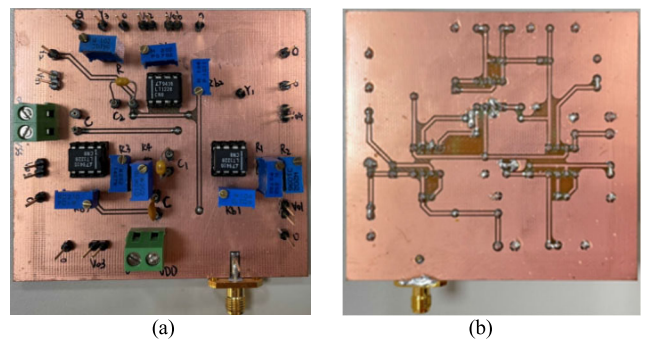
First PCB prototype (a) top view and (b) bottom view of the measurement circuit in Fig. 2.
